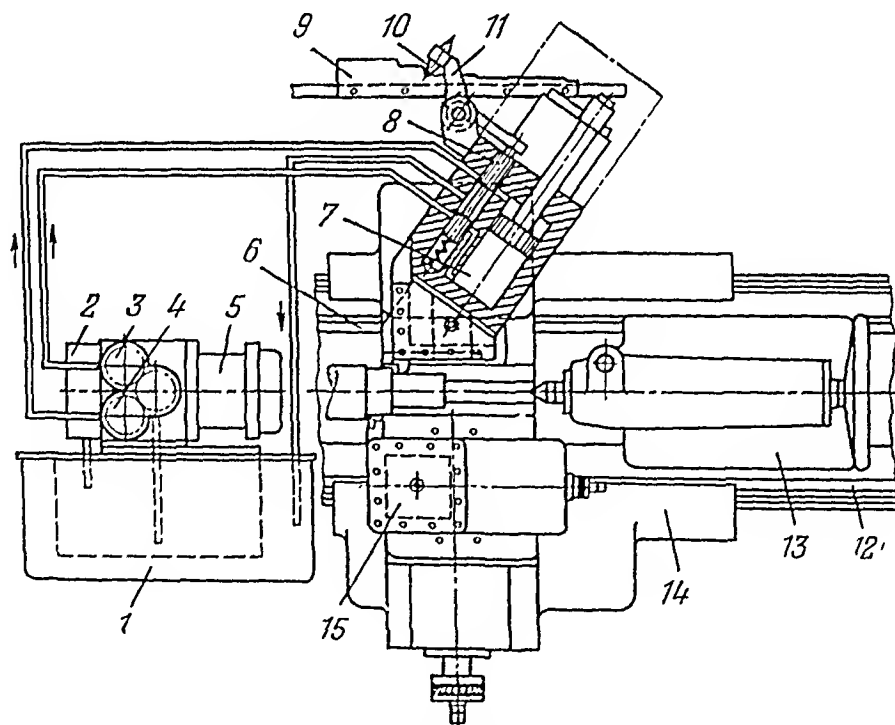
Hydraulic tracer-controlled slide for rear installation:
